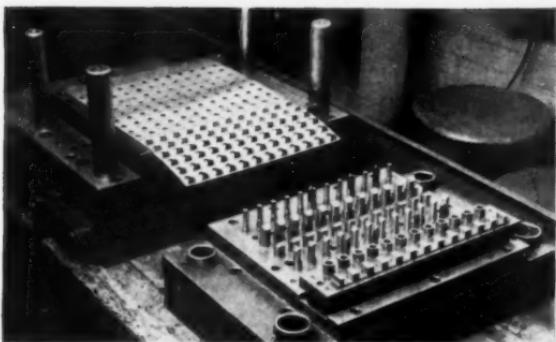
The progressive die pierces and forms the fins. The first stage pierces hole, second locates points, third accomplishes cross slitting, fourth completes slotting, fifth produces longitudinal slit on center with the hole, sixth is an additional piloting operation.
